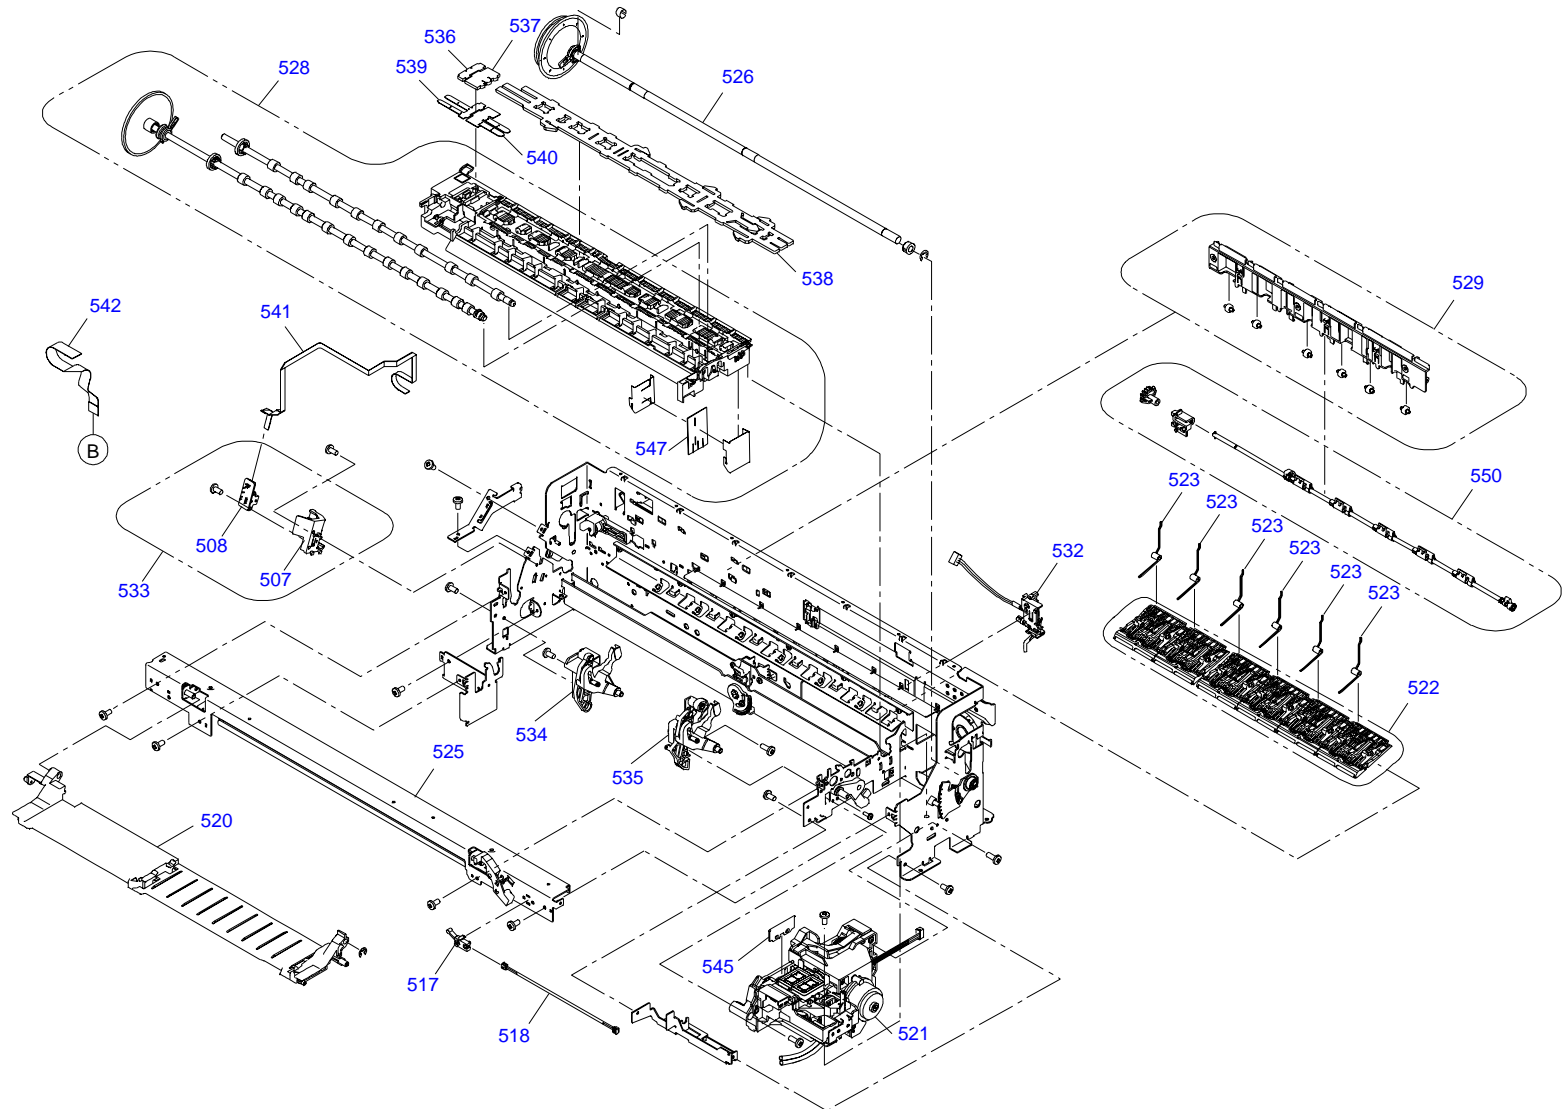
Stylus Photo R1800 Exploded Diagram 3
